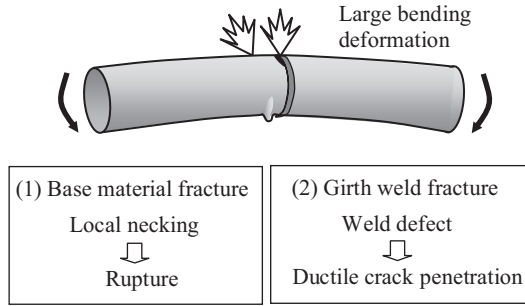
Assumed fracture mode of girth weld pipe
